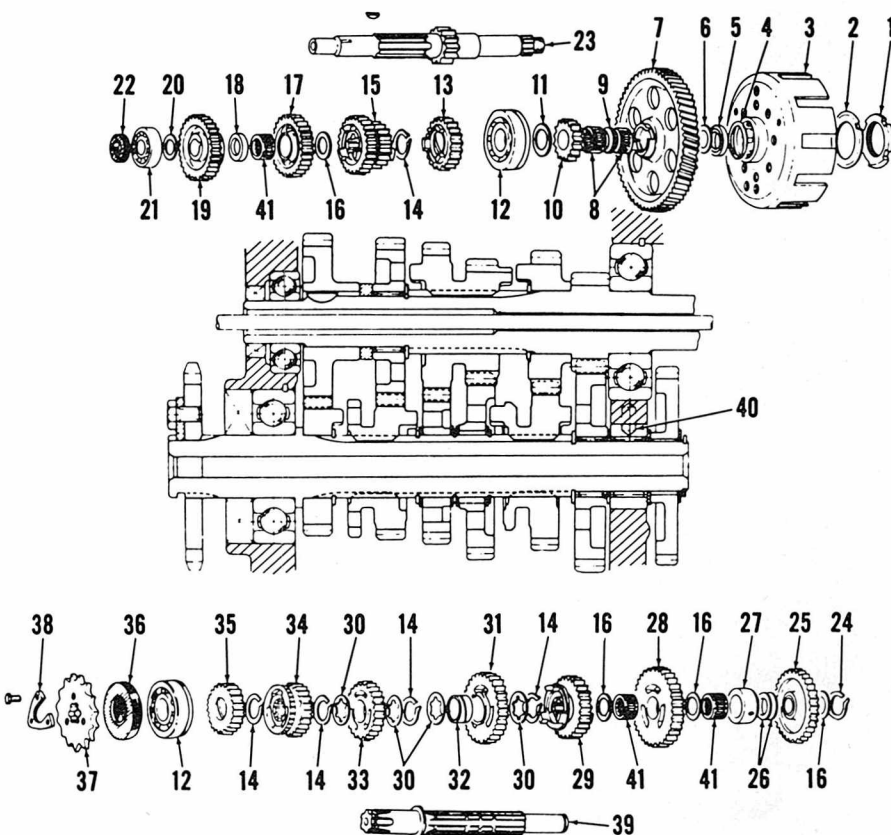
Cross sectional and exploded views of transmission input shaft (23), output shaft (39) and associated parts. Dowel (40) holds bearing outer race (27) in lower crankcase half.
